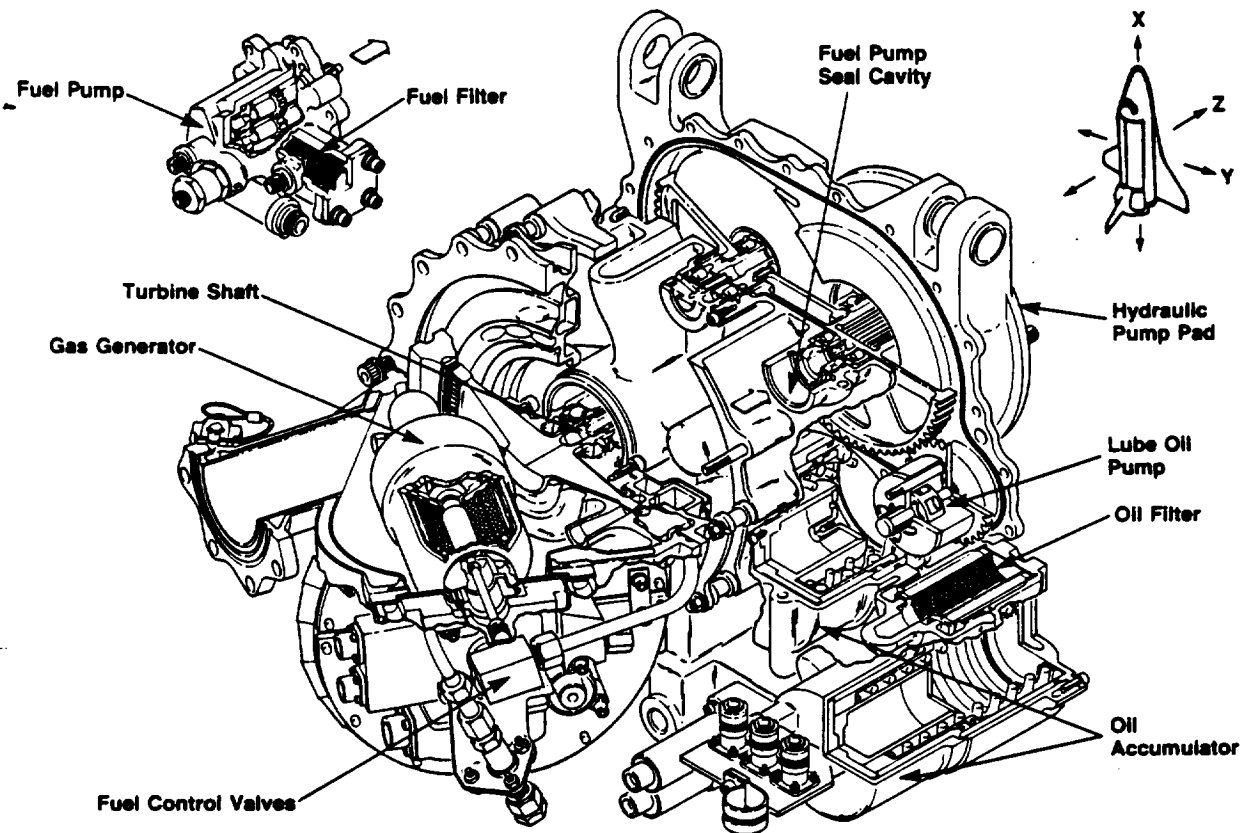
AUXILIARY POWER UNIT ASSEMBLY.
